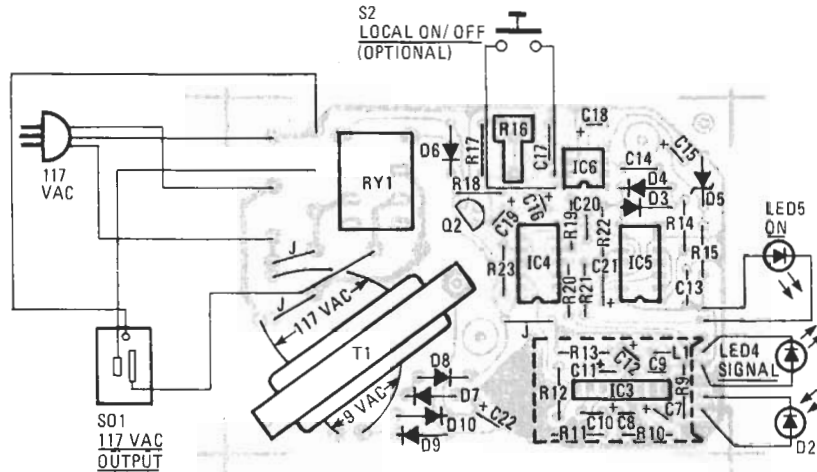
COMPONENTS MOUNT ON THE RECEIVER BOARD as shown here. One shield must be soldered to each side of the board after testing confirms that the preamplifier works.
